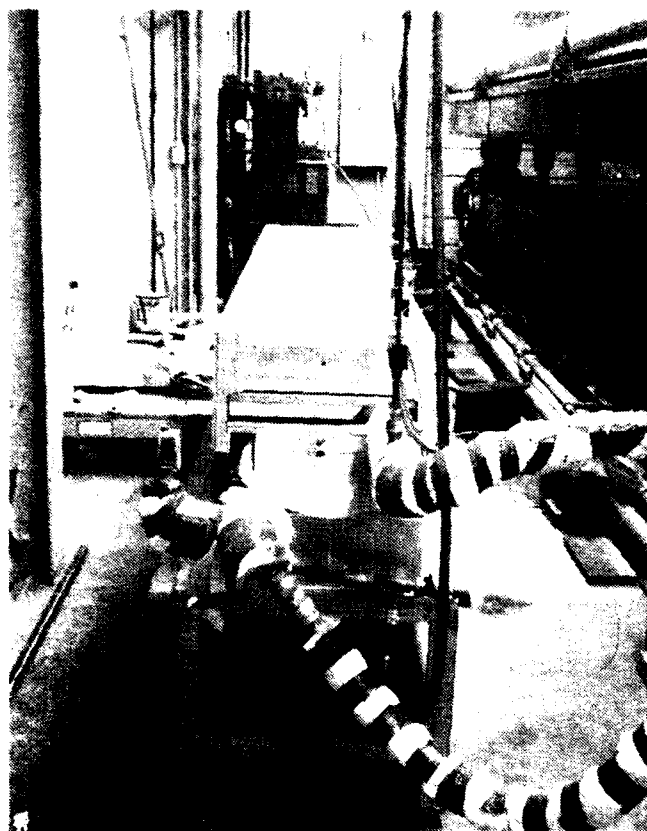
Mold Insert Loaded and Ready for Cure.
